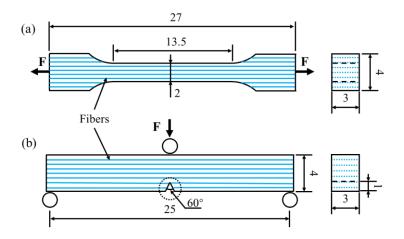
(a) Dimensions of specimen for tensile tests; (b) Dimensions of specimen for prenotched 3-point bending tests.
